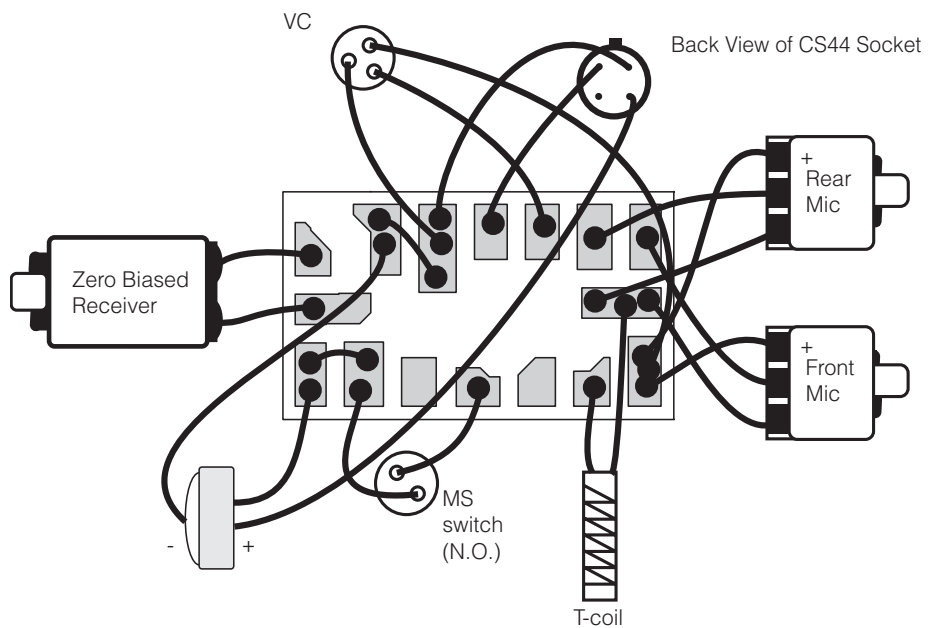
Typical Hearing Instrument Assembly Diagram
